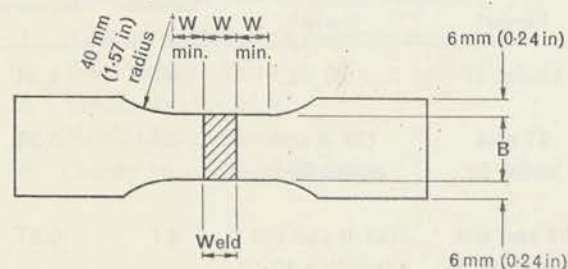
SPECIMEN NO. 3 TENSILE TEST FOR JOINT
